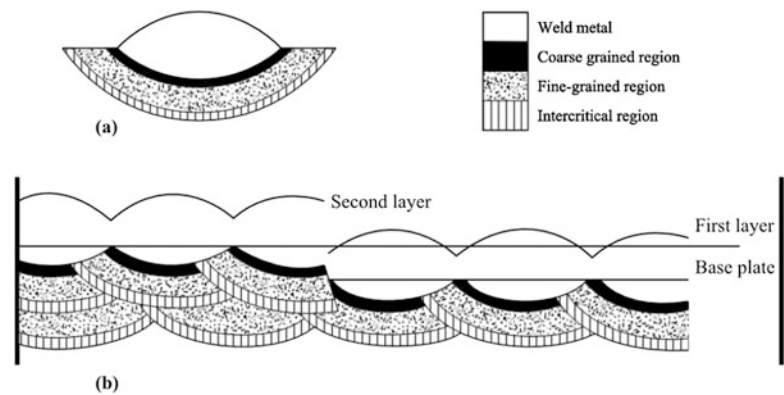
Schematic showing a two-layer repair welding. (a) HAZ of a single weld bead. (b) First layer causes coarse-grained regions to form in the HAZ of the base metal. (Source: ASM Metal H/B, Vol.6)
